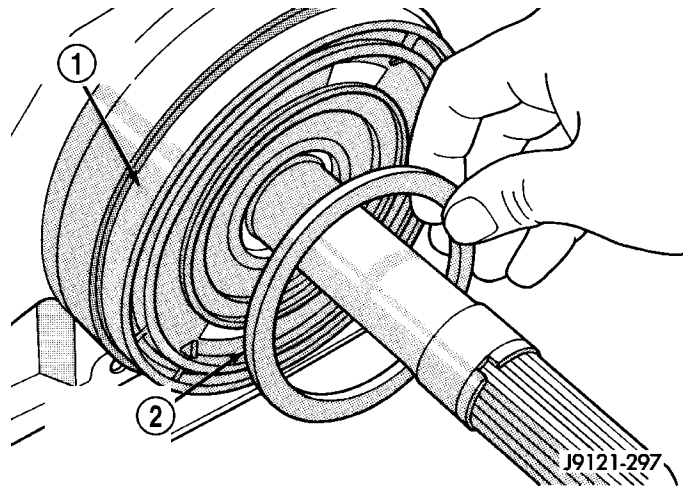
Overdrive Piston Thrust Bearing Removal/Installation
